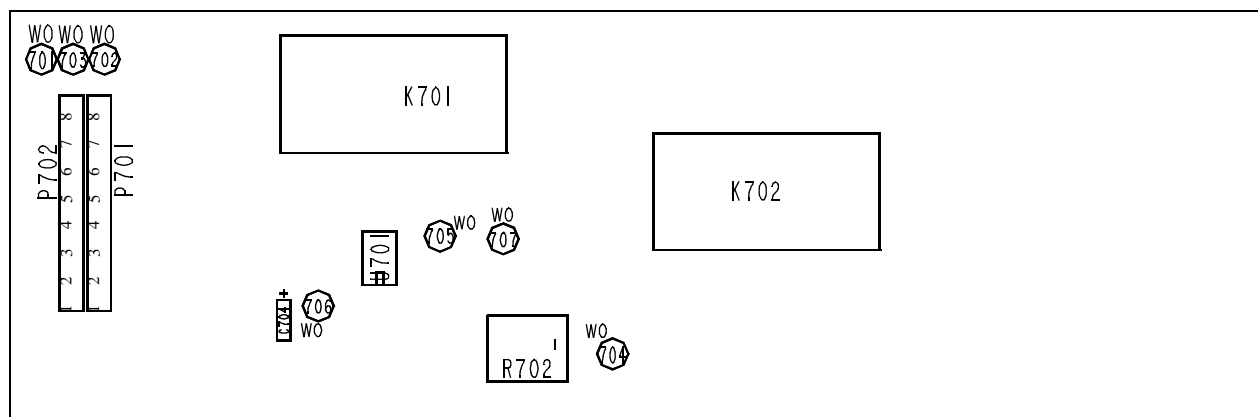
AUDIO REVERT BOARD ALIGNMENT POINTS
